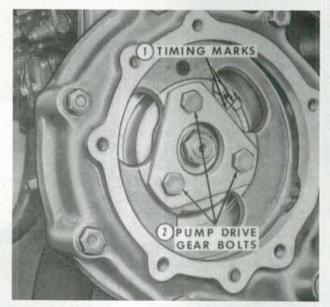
Remove pump drive gear cover from front of timing gear cover to view injection pump timing marks.
